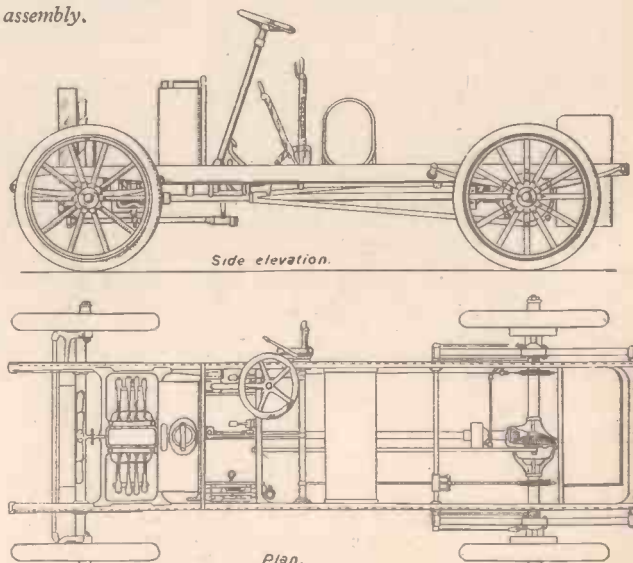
Layout drawing of 1904/5 Serpollet car.
